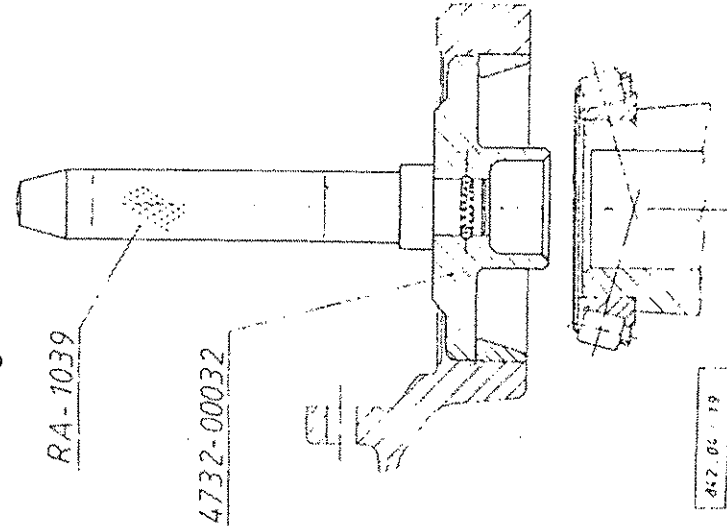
DRIVING IN THE TAPER ROLLER BEARING CUP
